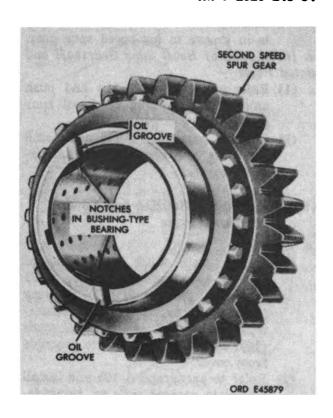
Second-speed spur gear with bushing-type bearing installed.
